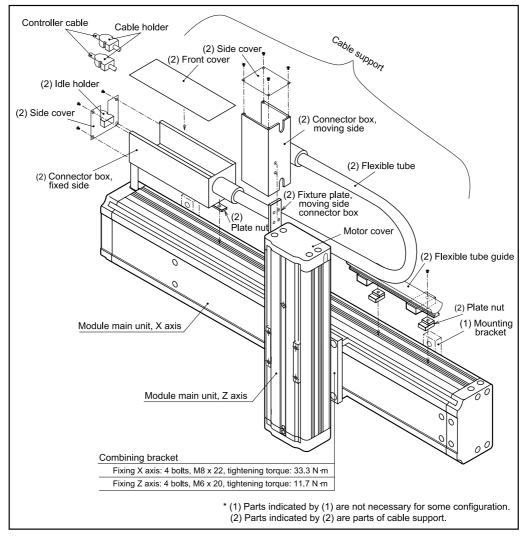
A type combination: Assemble of connector box (moving side) and fixture plate
